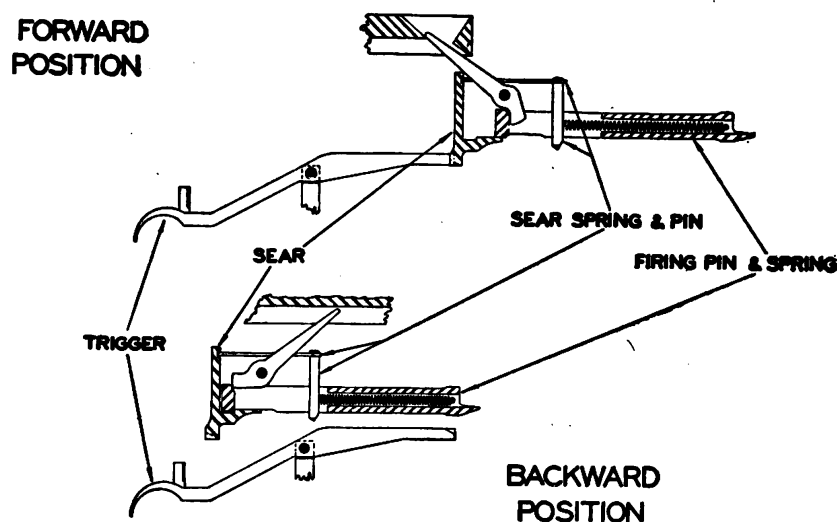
Firing mechanism, Browning caliber .30 machine gun.
